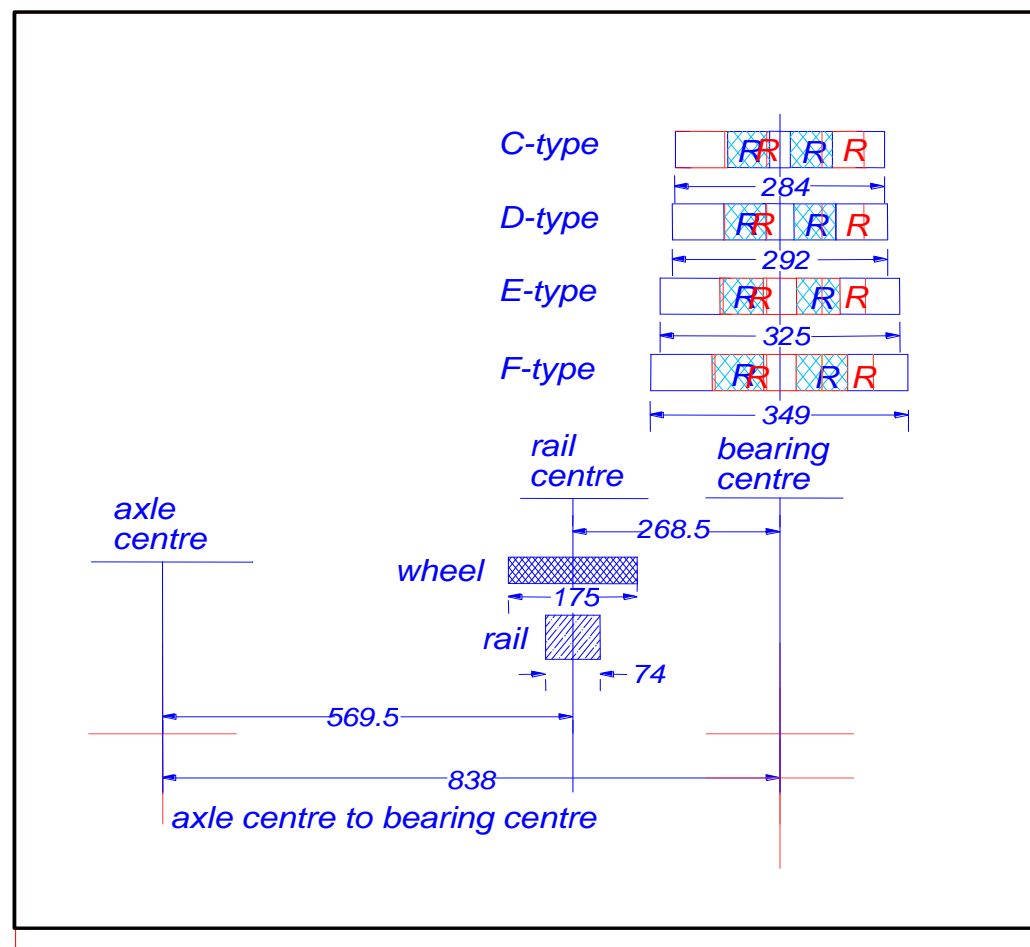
Measurement position for bearing types used by Transnet relative to rail geometry
